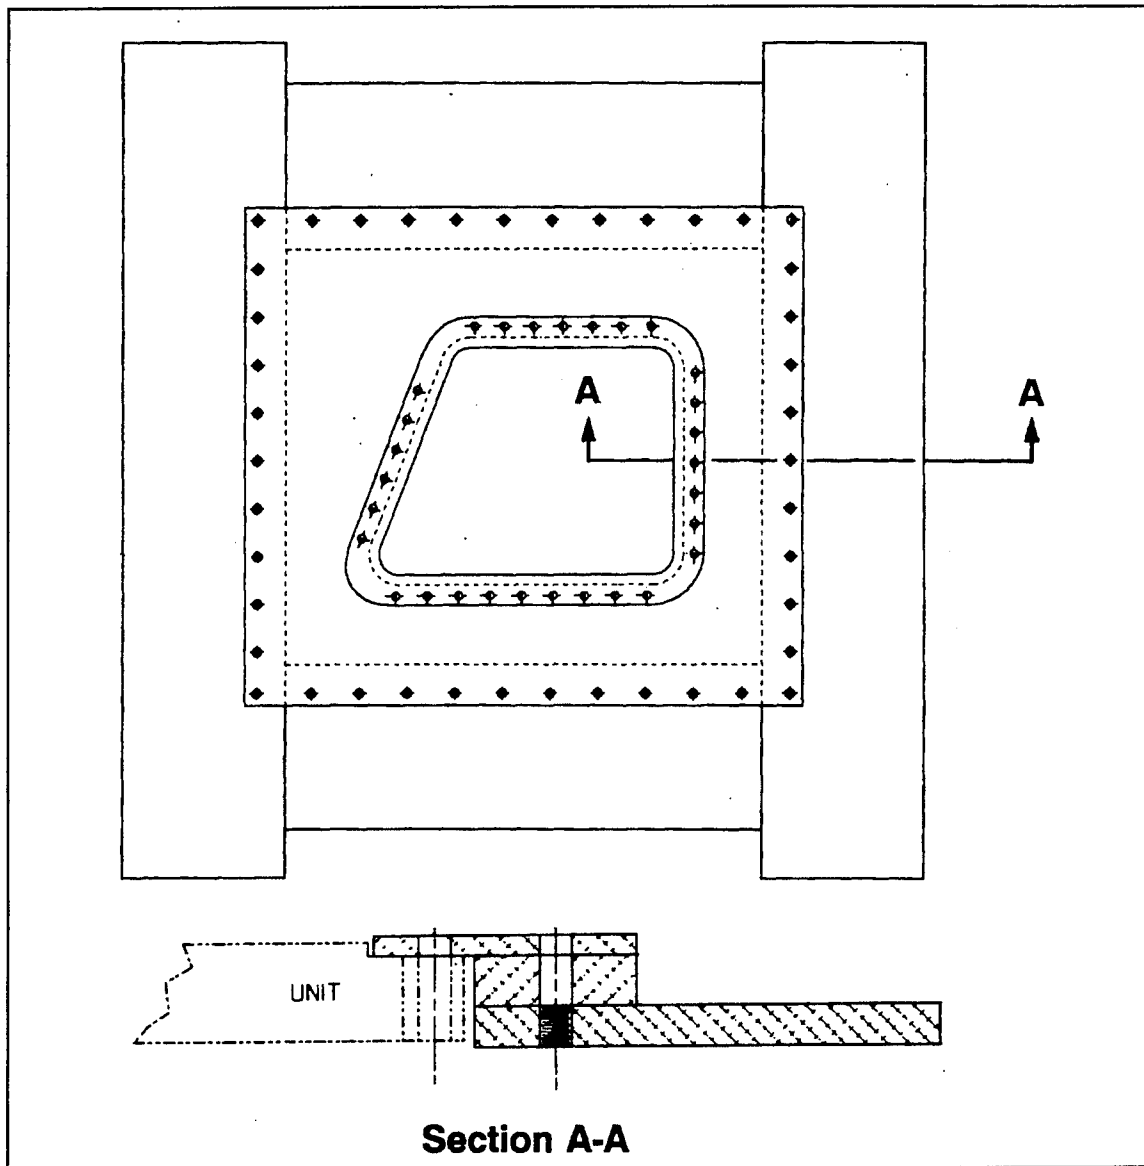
C/KC-135 #4 W/WS Bird Impact Mounting Frame
